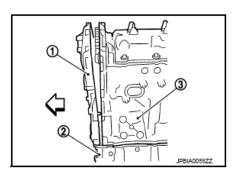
Identifying Front Timing Chain Case, Upper Oil Pan And Cylinder Block Courtesy of NISSAN NORTH AMERICA, INC.
